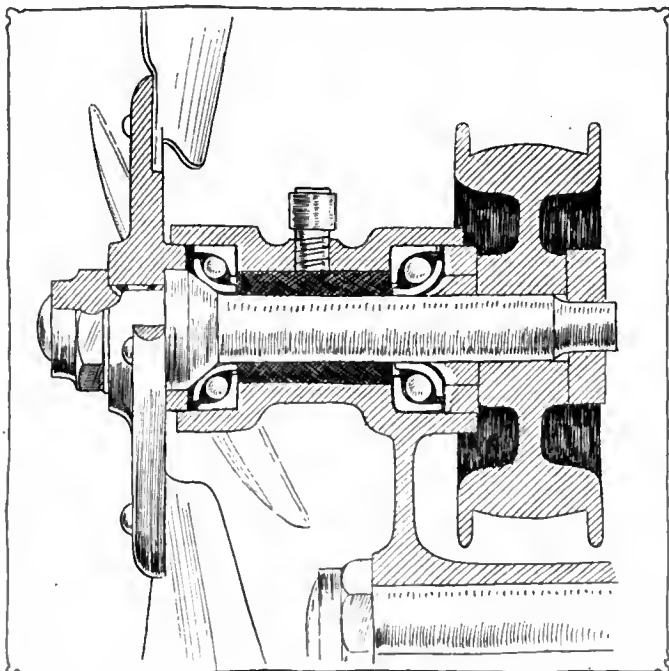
Balanced fan drive; pulley and fan on opposite sides of bearing
